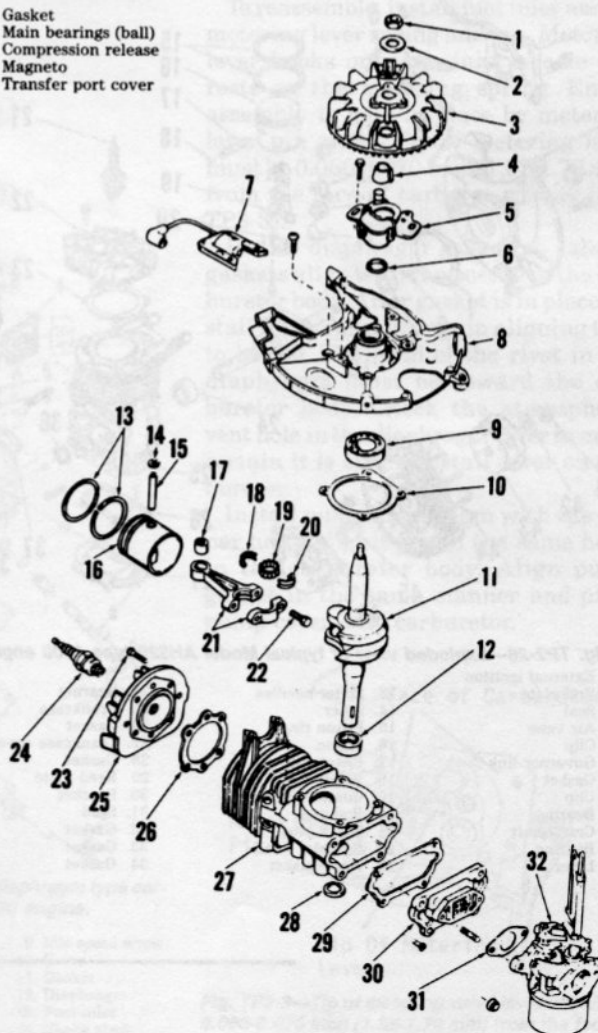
Exploded view of typical AV750 engine. Refer to text when assembling reed valve (11, 18 and 25). Model AV817 engines are similar.
